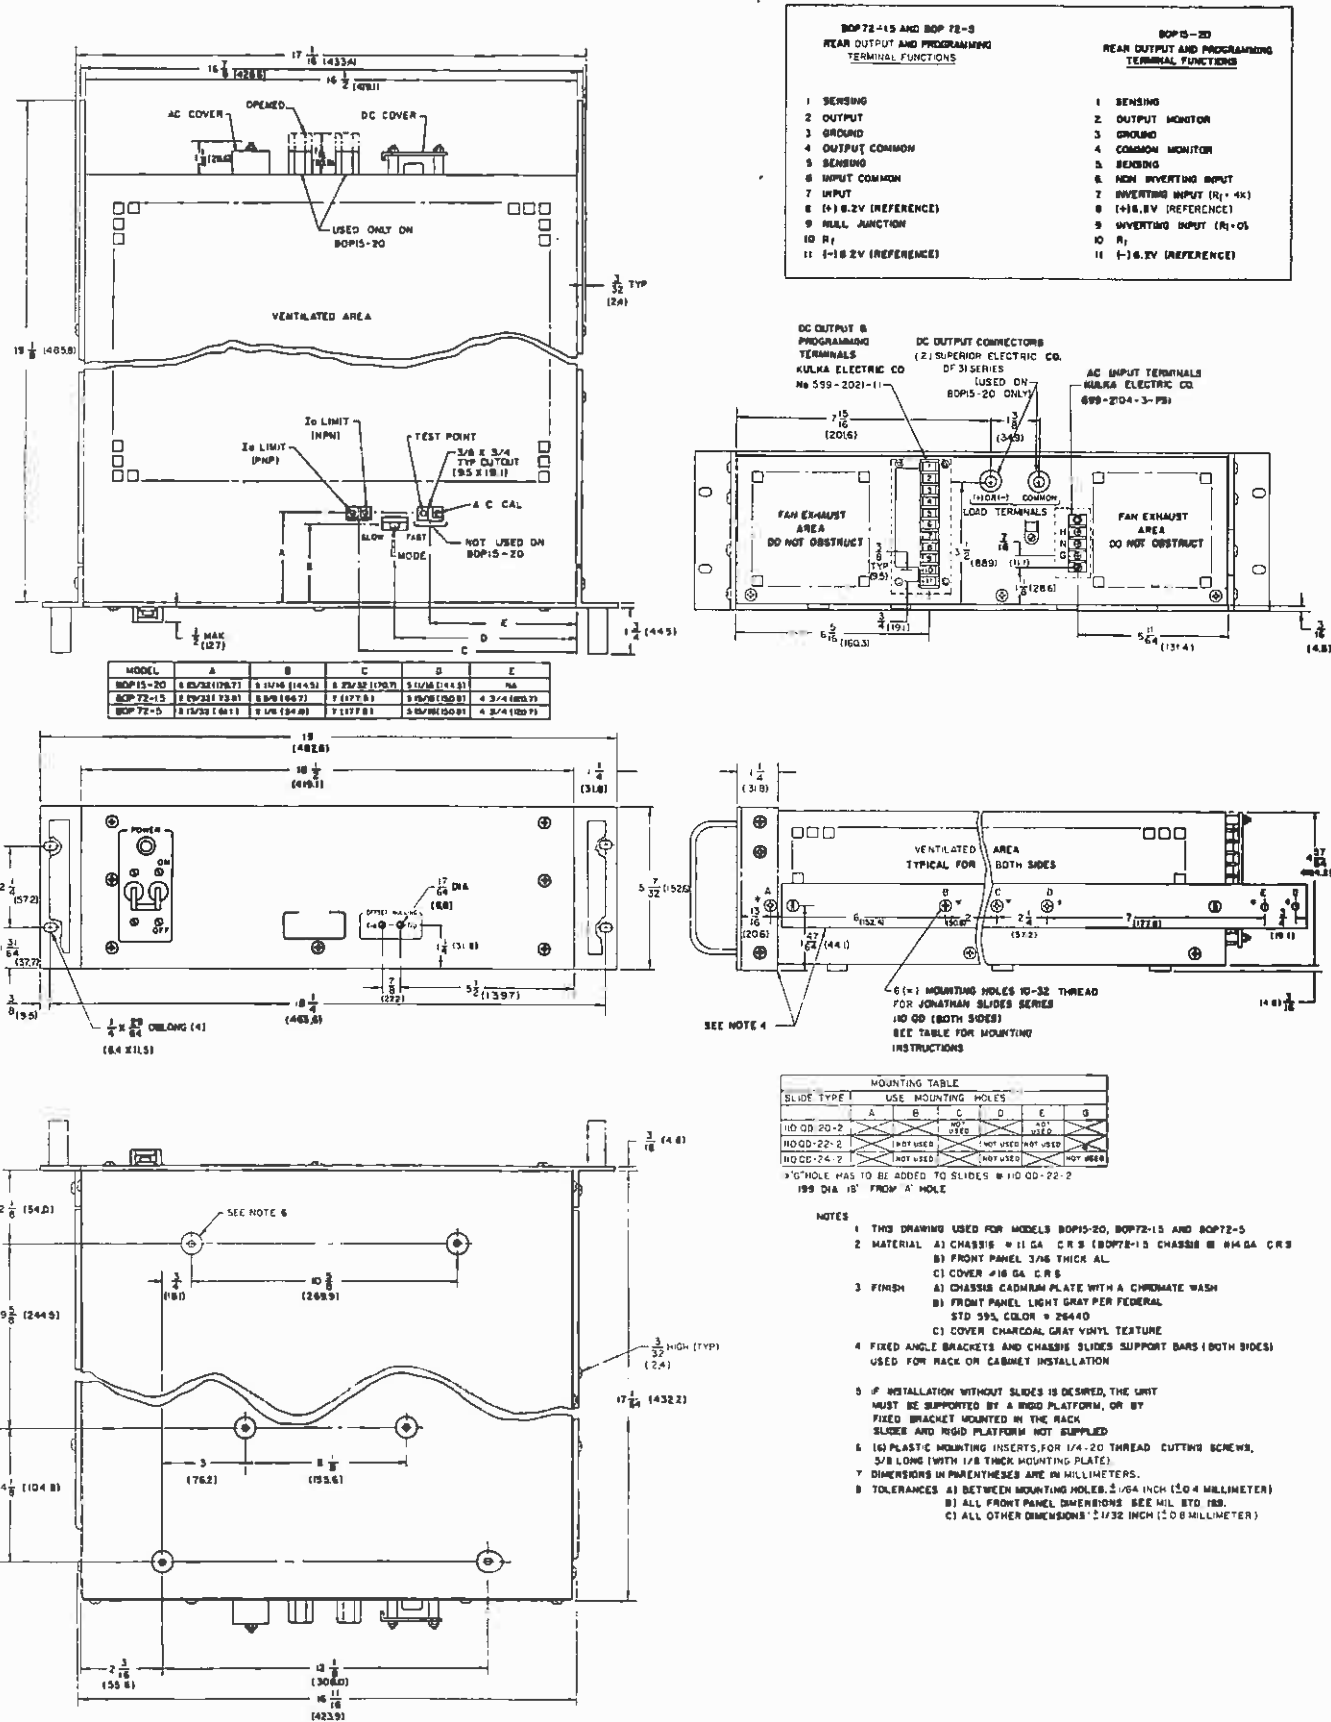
MECHANICAL OUTLINE DRAWING
